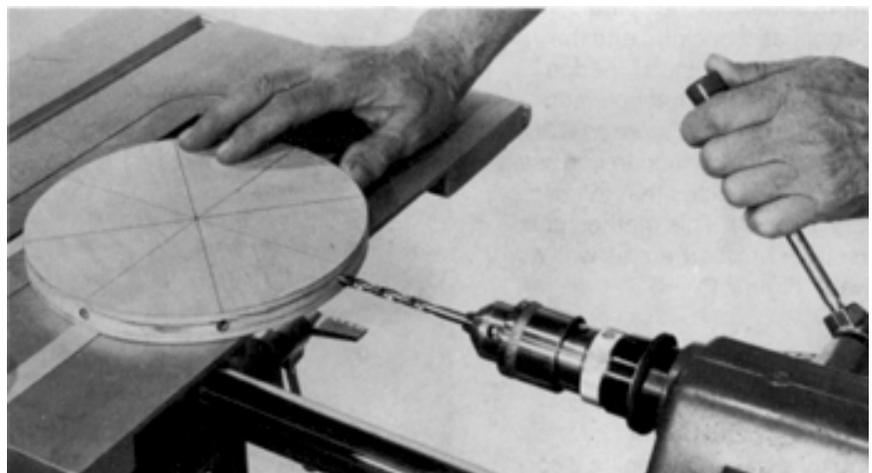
Using the pivot method to bore radial holes into the edge of a circular workpiece.
